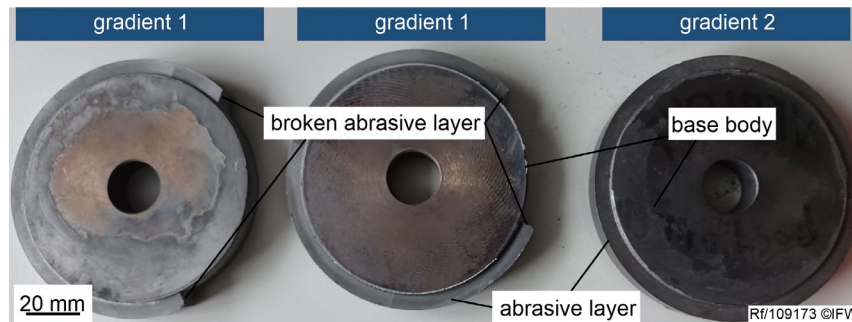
Graded grinding wheels manufactured on the basis of (60/40) bronze.
